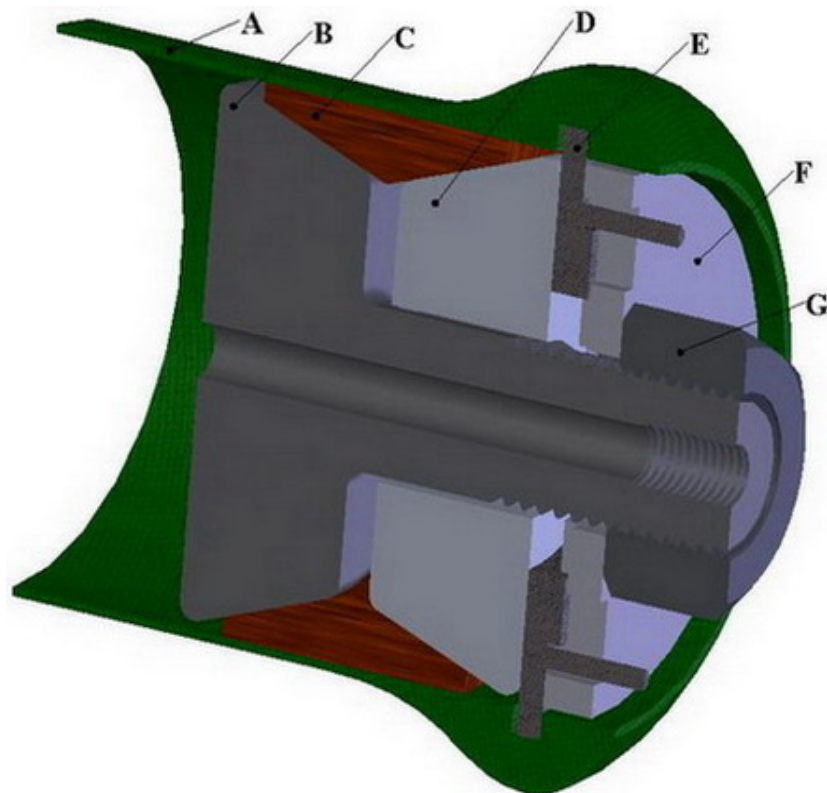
Cutaway view of a part of prepared specimen for internal pressure testing and subsections (Onder, 2009). A: Composite pressure vessel; B, D : Compressing parts; C : Rubber seal element ;E : System locking member component; F : Flange; G : Nut.
